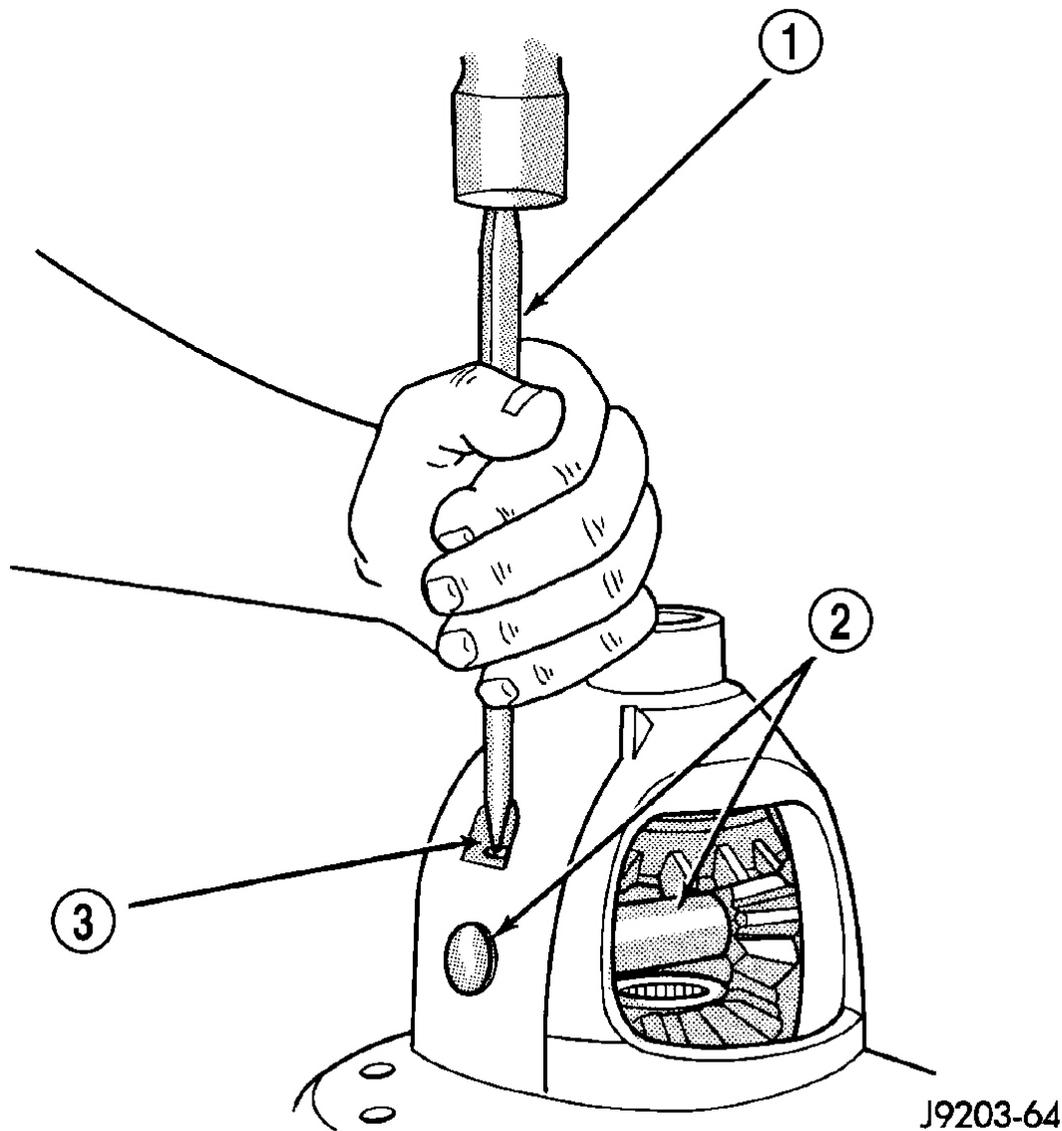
Installing Roll-Pin In Differential Case With Hammer And Punch
